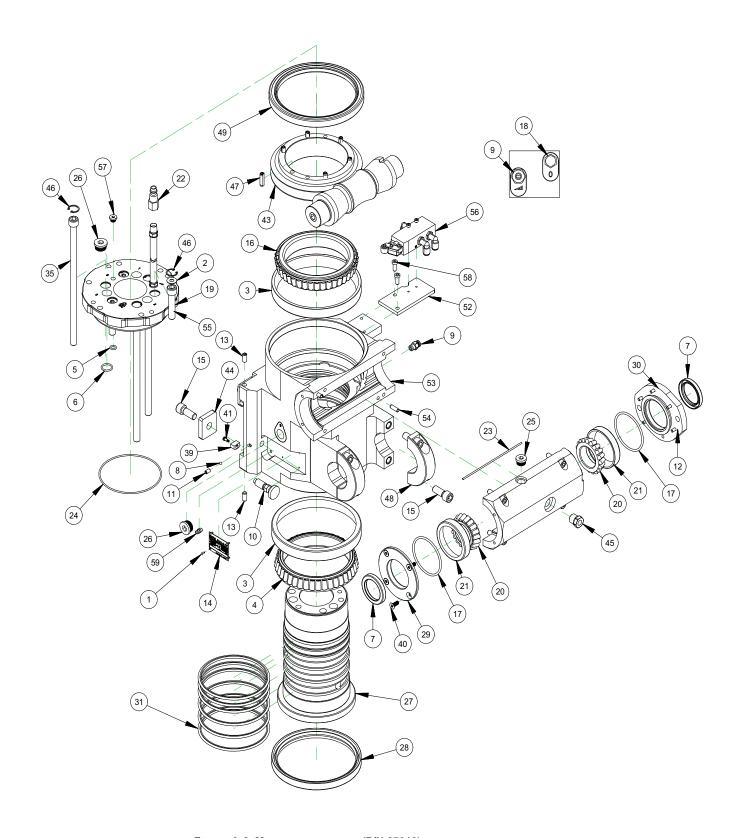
MAIN BODY ASSEMBLY (P/N 87913)
